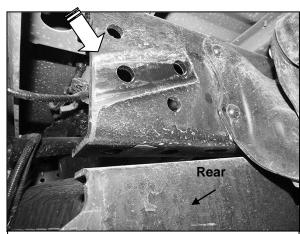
Remove hex nuts from bumper brackets Unplug and move wiring harness away from bumper
